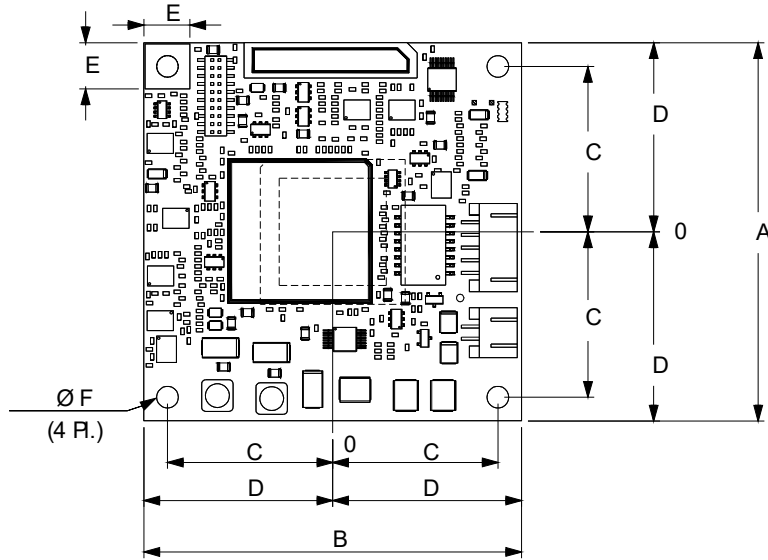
XETK-V2.0B Dimensions - Top View
